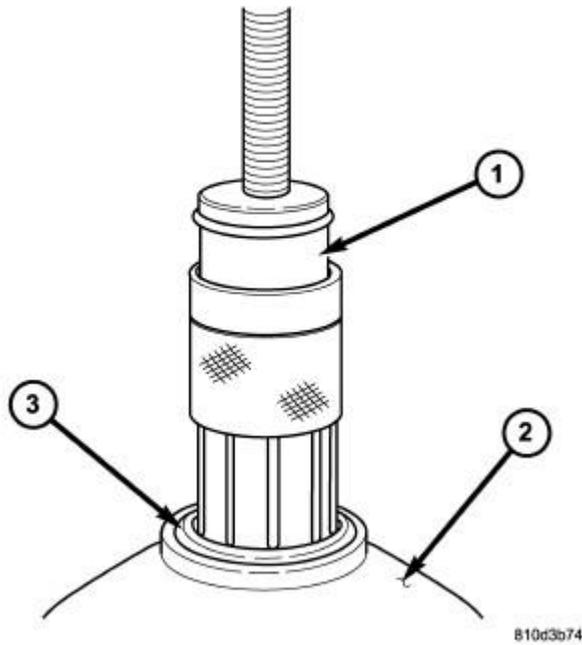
Positioning Bearing Remover 9082A Over Inner Race Of Output Shaft Bearing
